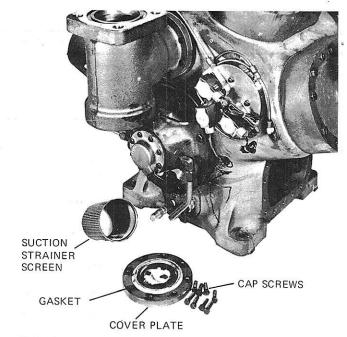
SUCTION STRAINER — 4, 6 & 8 CYLINDER COMPRESSOR
